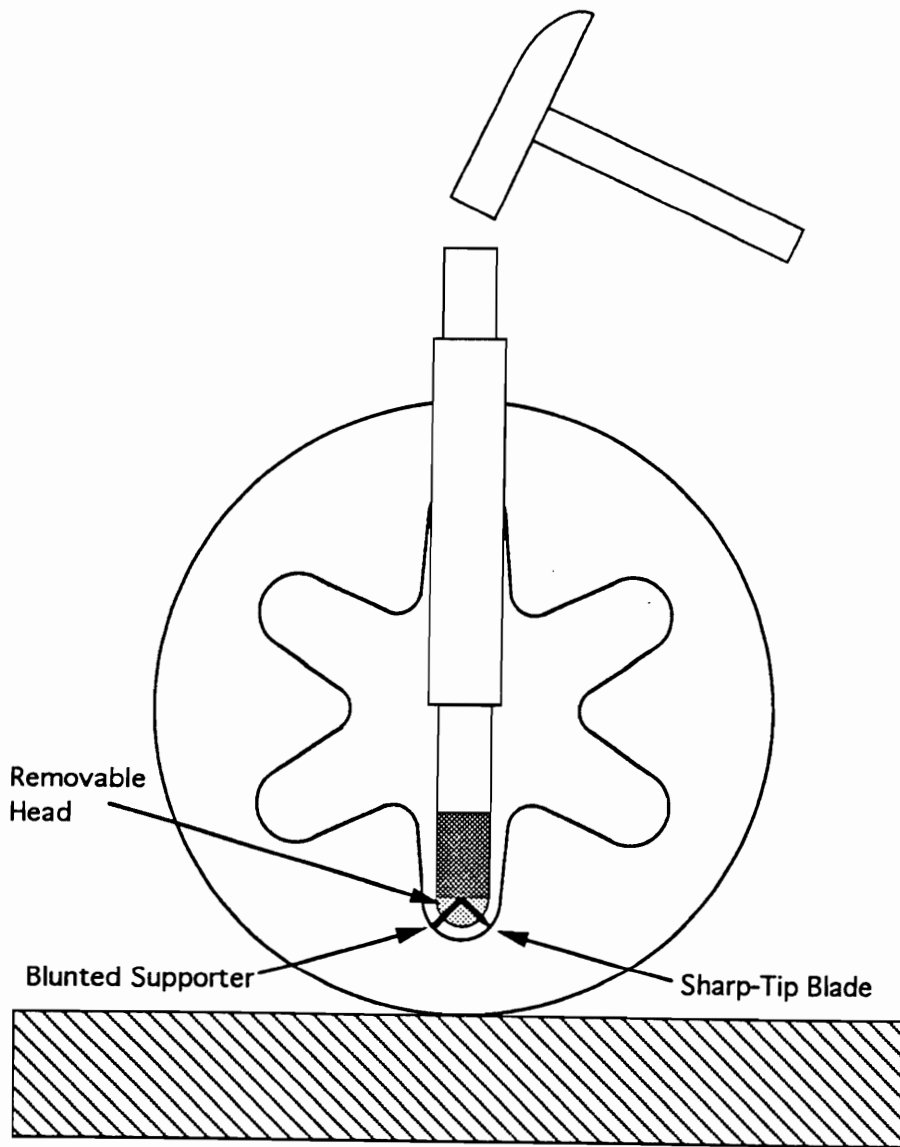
Fixtures for making off-axis cracks.
